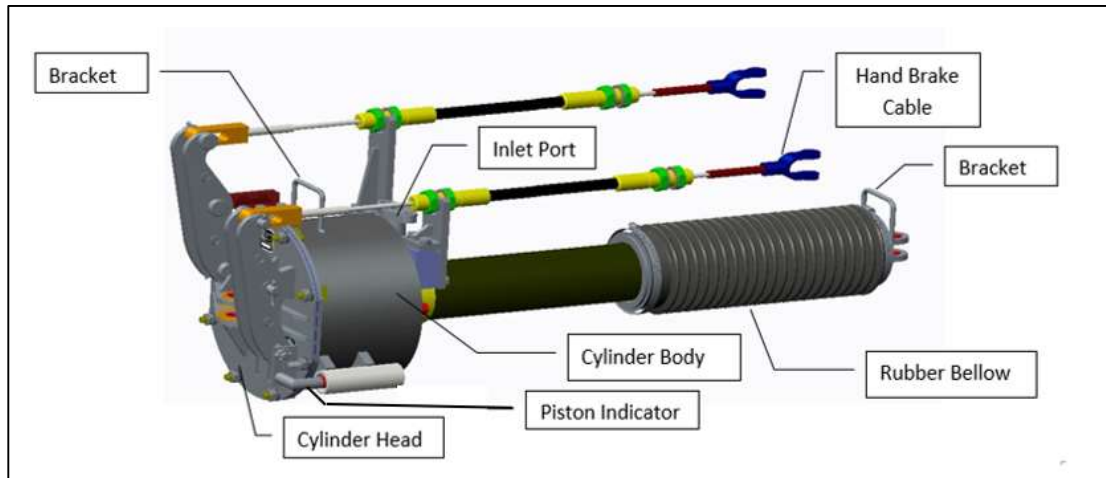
Brake Cylinder – 11 Inch with hand brake arrangement (Drg. No.3EB7348 Alt. Latest)
